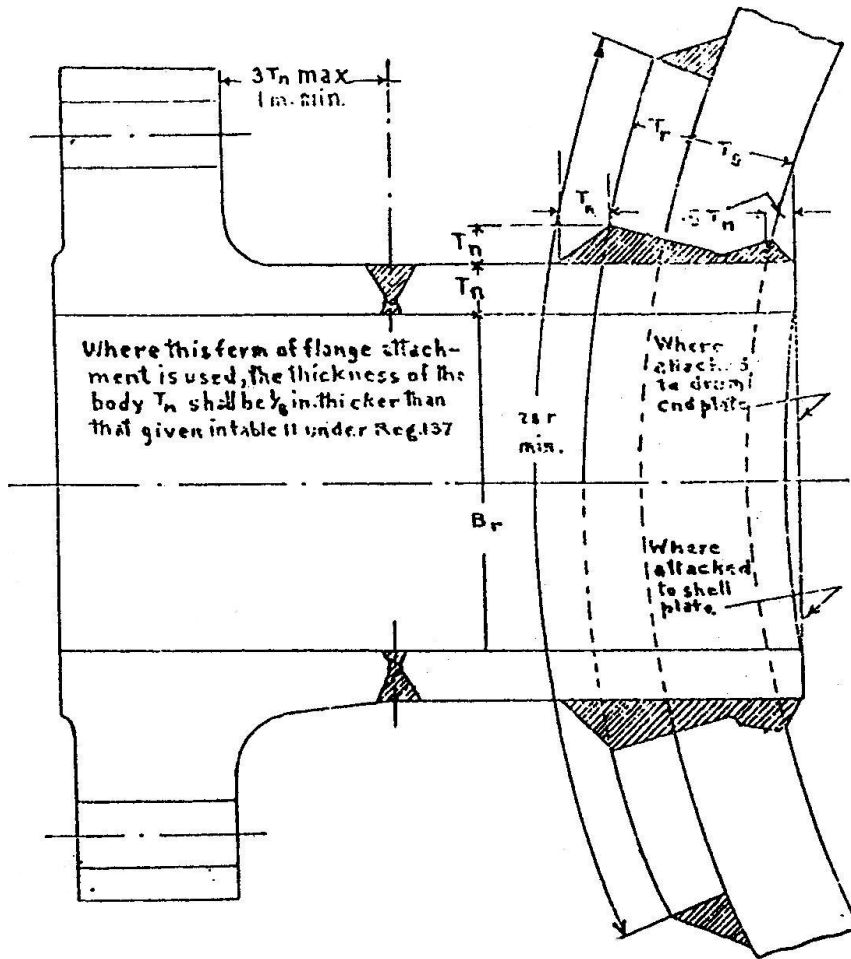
Minimum weld attachment for standpipe over 4 in. bore where compensating ring is required and for attachment of flange to stand pipes 6 in. bore and over (alternative to flange attachment shown in Fig.19)
